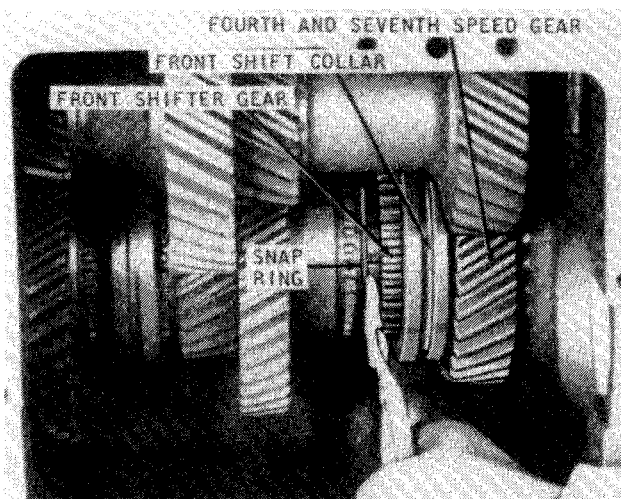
Remove the four snap rings from their grooves and slide forward as differential drive shaft is moved rearward. The front snap ring located between front shifter gear and “B” range gear is shown in this view.
